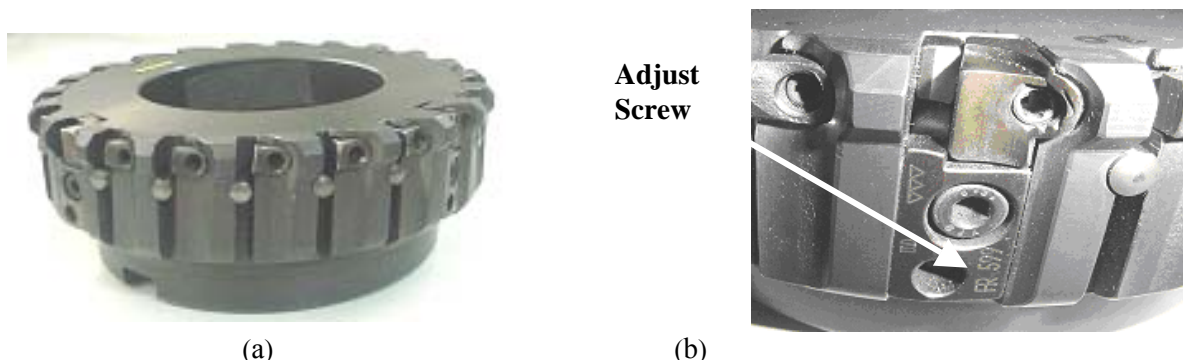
(a) The milling cutter used in the tests; (b) Detail of the screw that allow axial adjustment of the wiper inserts
